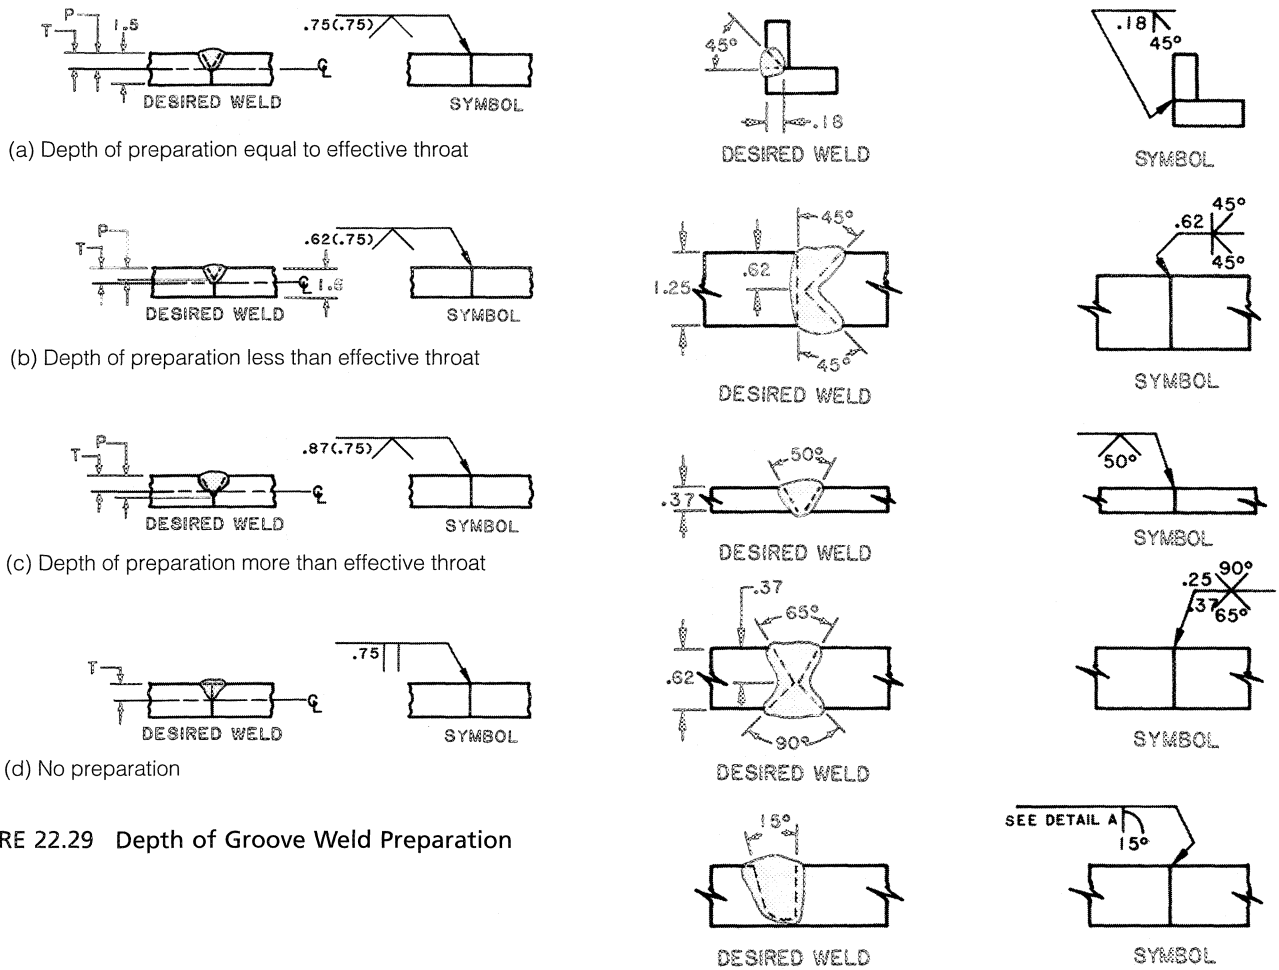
Depth of Groove Weld Preparation
